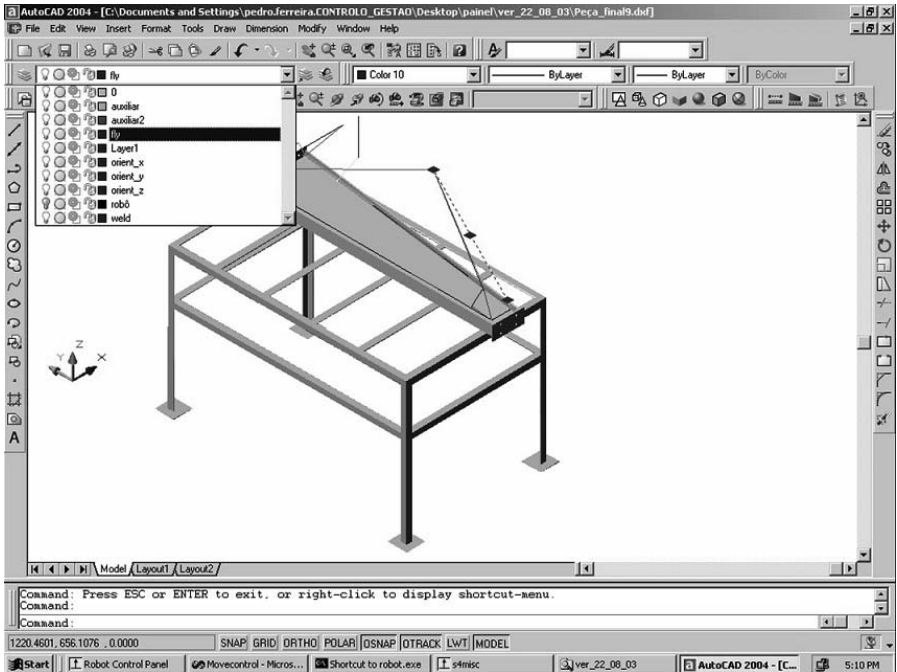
Example of welding trajectories using available layers (using AUTOCAD 2004)
